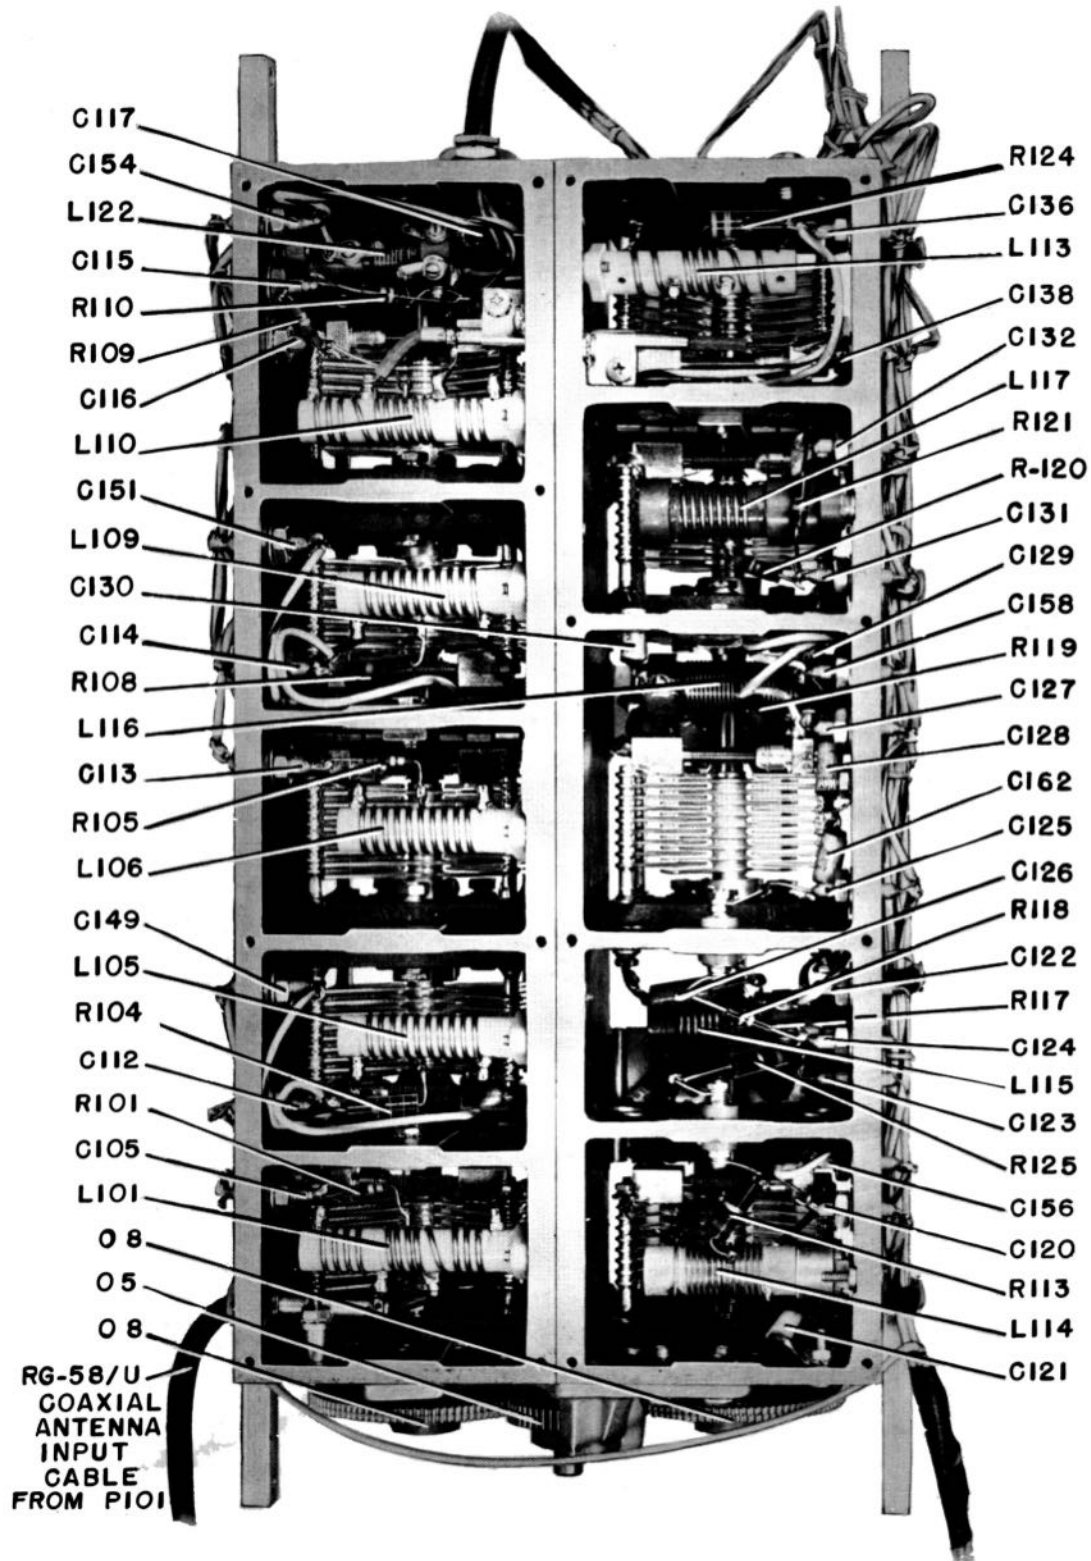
Preselector from Bottom, Shielding Covers Removed
